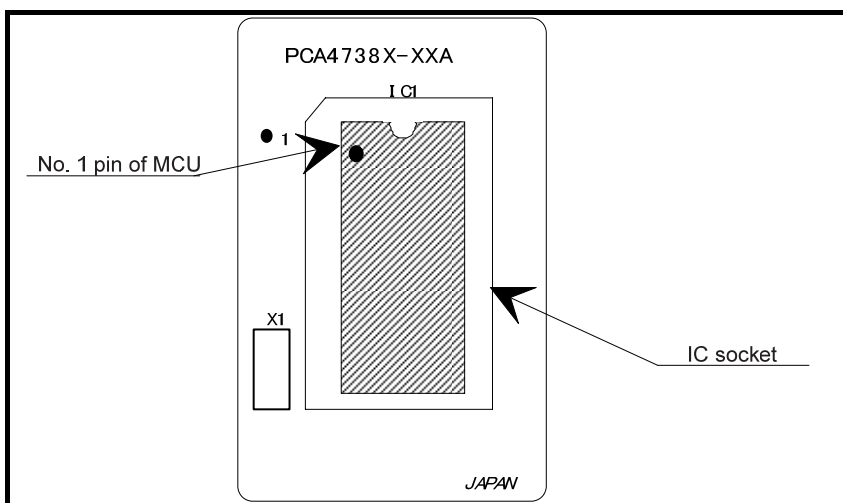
Mounting an MCU (adapters with DIP type IC socket)
